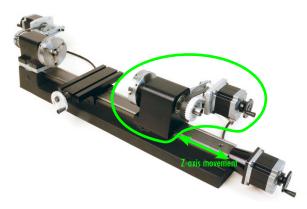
The green outline indicates the moveable headstock on the Z-axis. The headstocks on this lathe are turned by stepper motors with cog pulleys.
